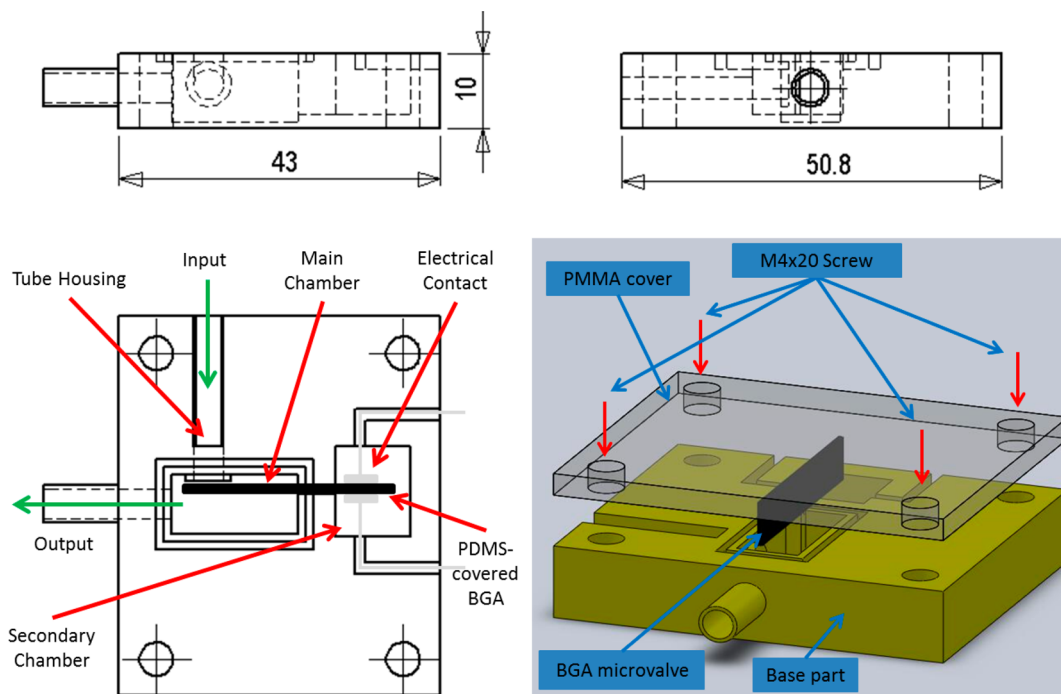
Schematics of the base part and the exploded view of the flow regulator assembly.
